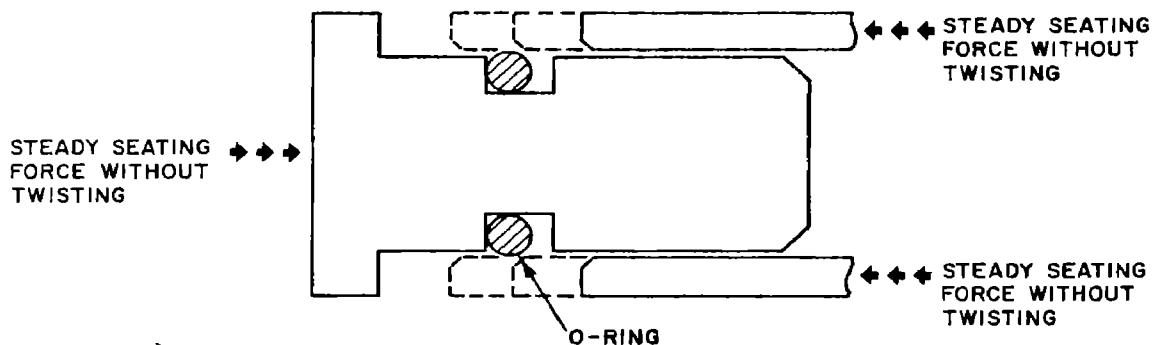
Seat O-ring with a steady or steadily increasing force --no twisting.
